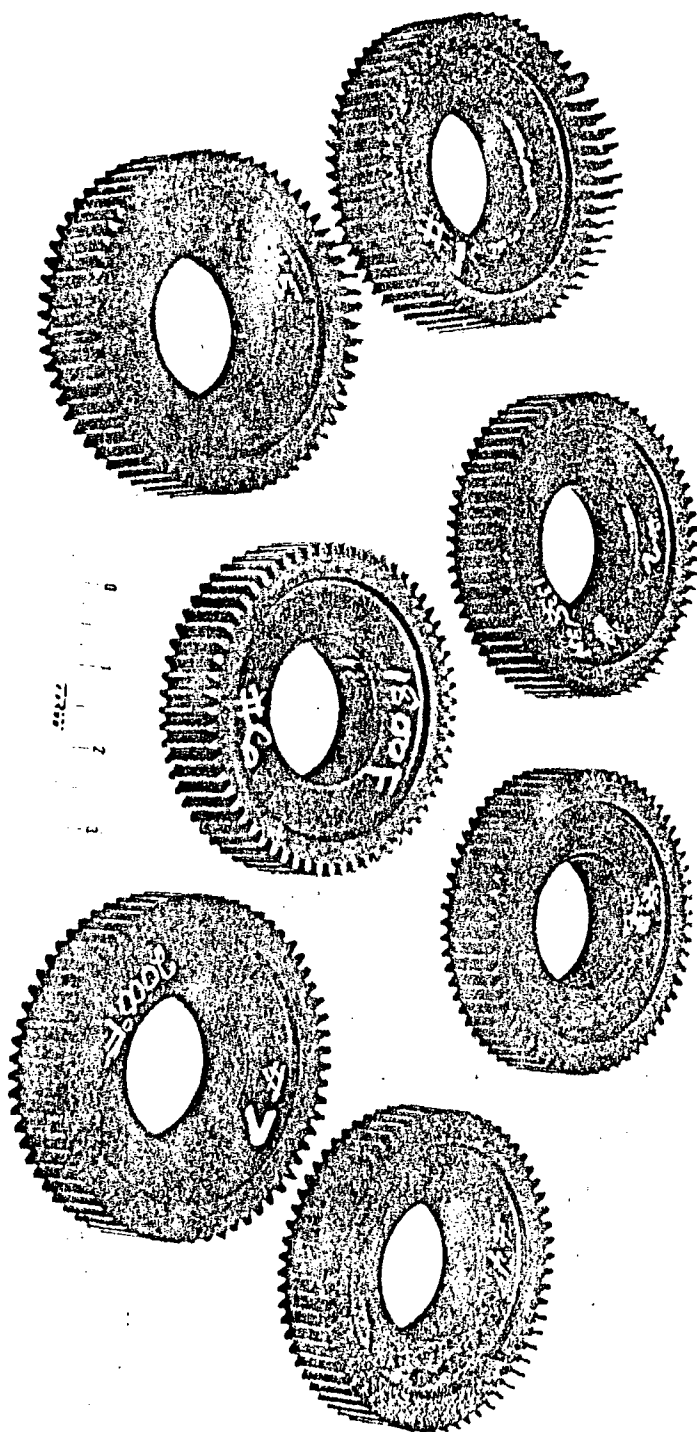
Trial Forgings of AGT 1500 No. 6 Accessory Gear For a Preform Preheat Temperature Range 1800° to 2200°F.
